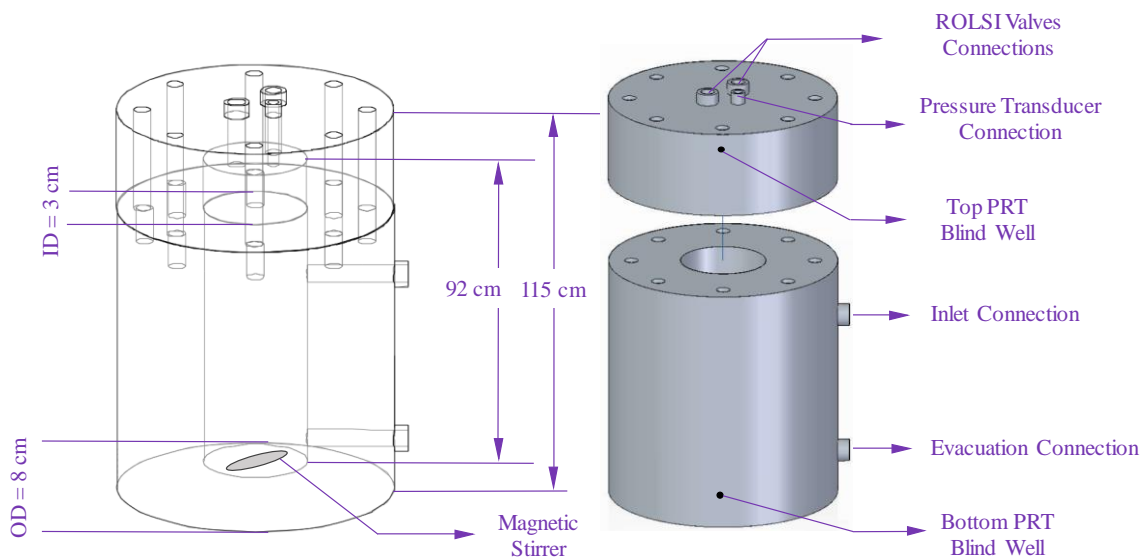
Visualisation showing an exploded view of the equilibrium cell.
